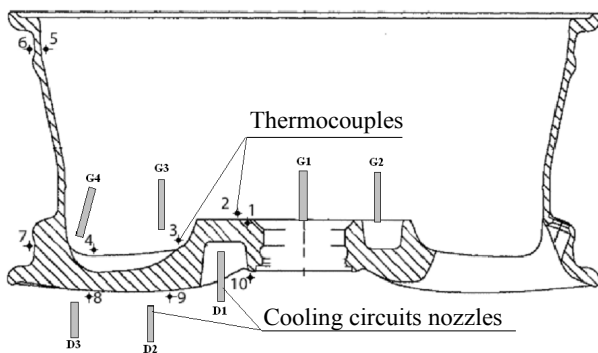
Layout of thermocouples and of cooling circuits nozzles
